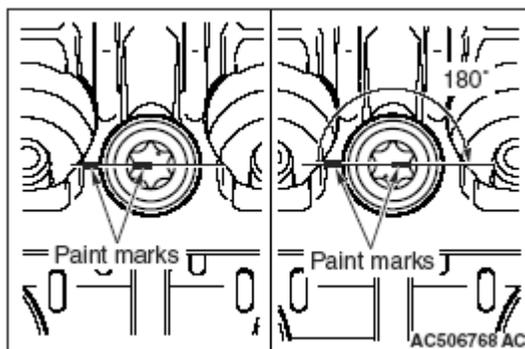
Identifying Paint Mark On Cylinder Head Bolt Head And Cylinder Head
